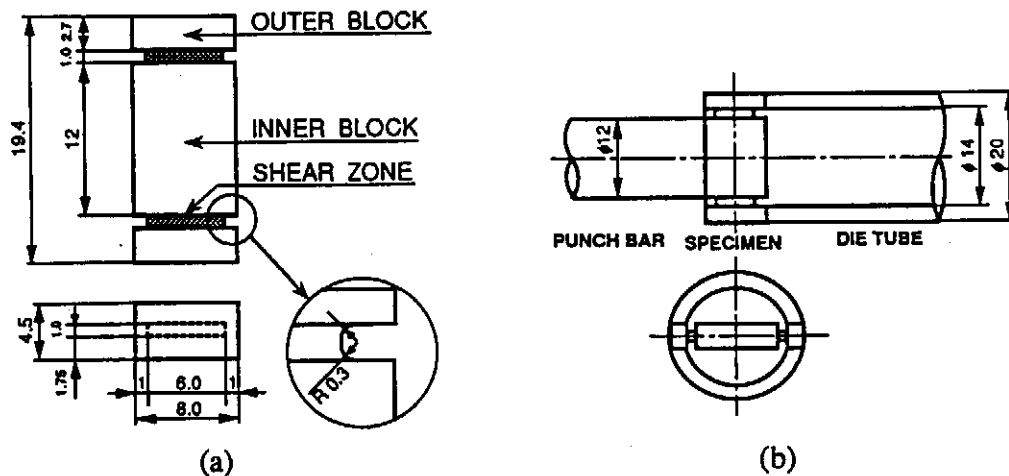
(a) Impact shear test specimen and (b) attachment to Hopkinson bars
